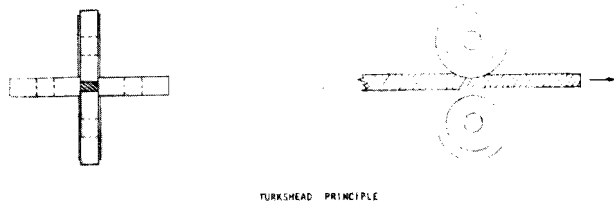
TURK'S-HEAD METHOD OF FORM ROLLING
